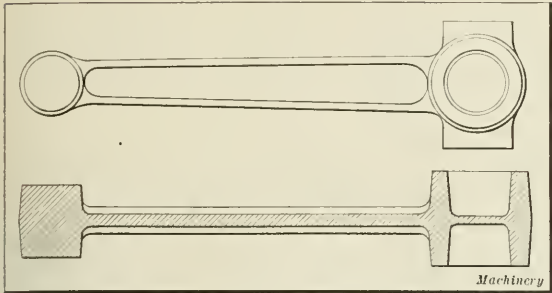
Automobile Connecting-rod which illustrates Differences in Dimensions of Adjacent Parts
